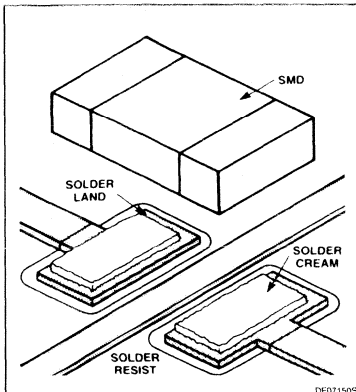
Component Lead, Solder Land, Solder Resist, and Solder Cream "Footprint"
